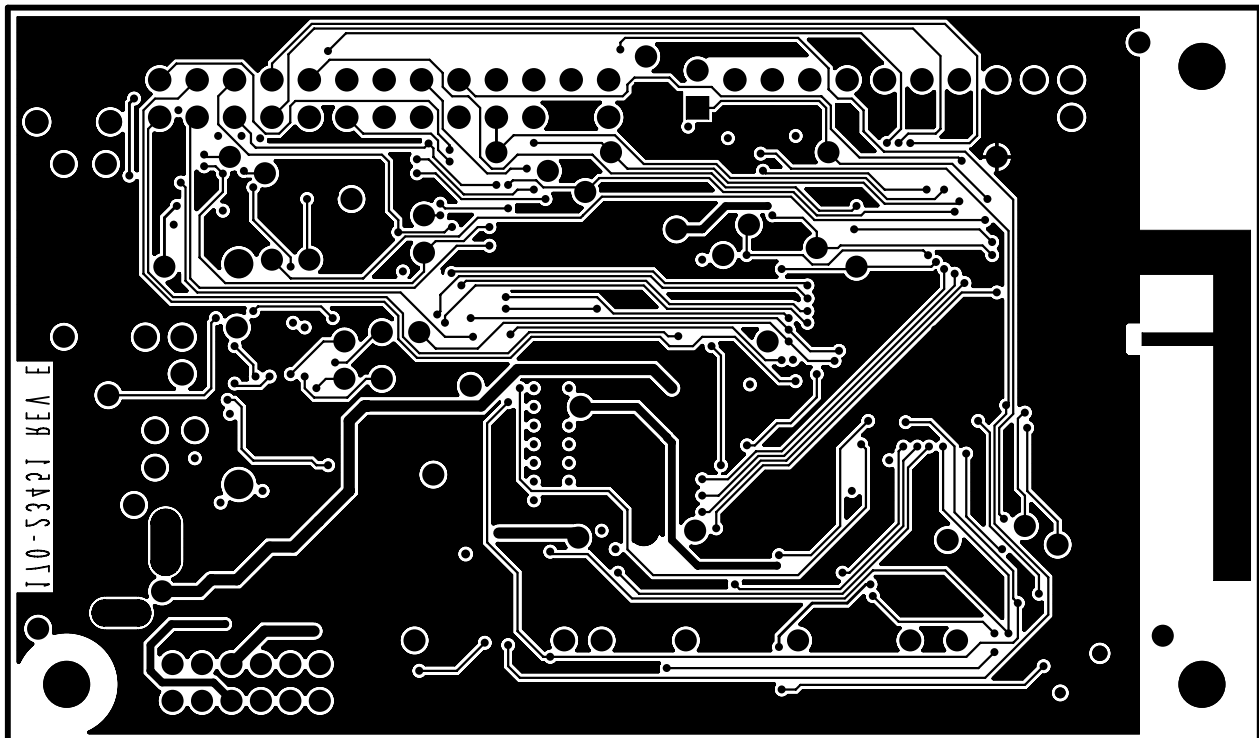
Sensor Node PCB Layout (Bottom View)
